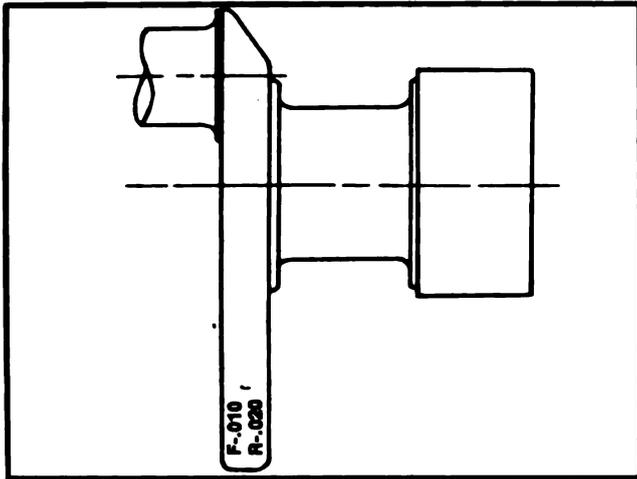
Marks To Show The Size Of The Thrust Surfaces.
